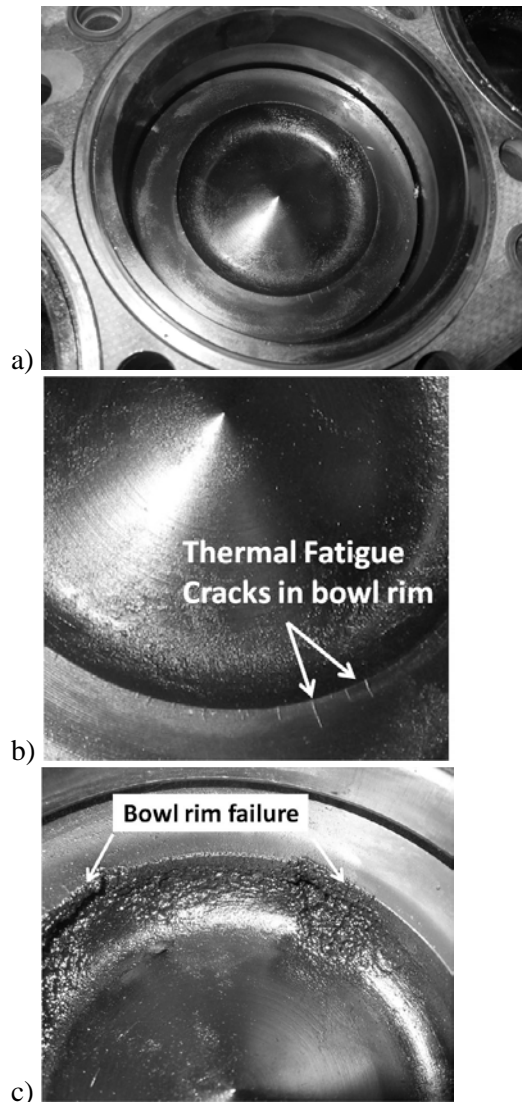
a) Piston in bore; b) cracks on inside edges of bowl rim; c) bowl rim failure
